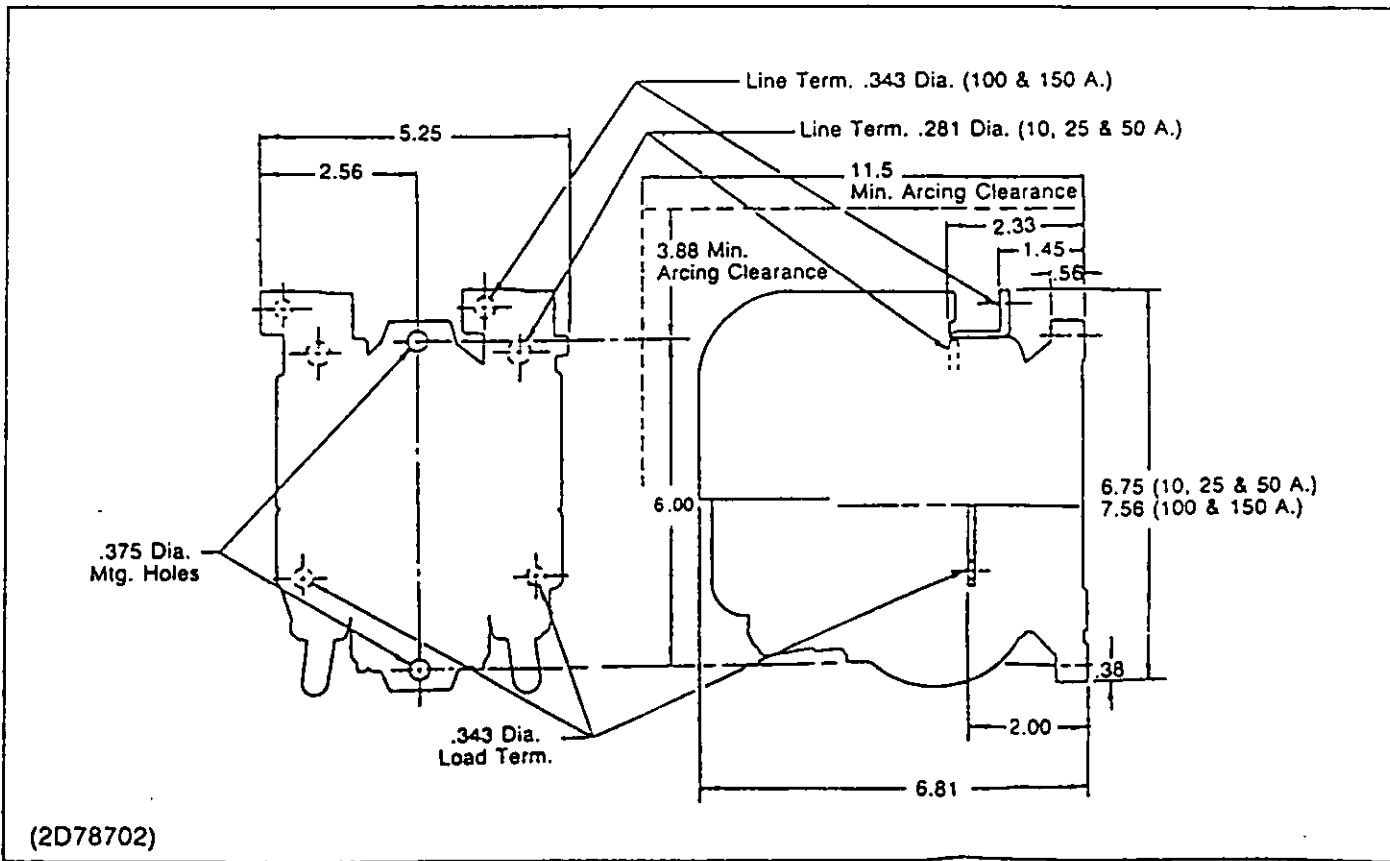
Dimension Drawings (Dim. in inches) of 2 NO Pole MME Contactor
